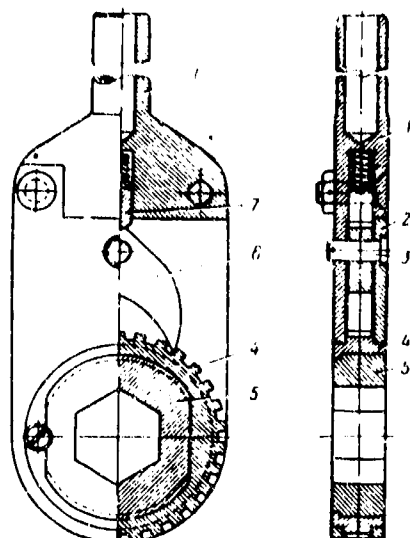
Ratchet Wrench with Detachable Head for Nuts Ranging from  $S = 41 - 110$  mm in Size: 1 - lever (handle); 2 - jaws; 3 - pawl axis; 4 - ratchet; 5 - detachable head; 6 - pawl; and 7 - stop.
